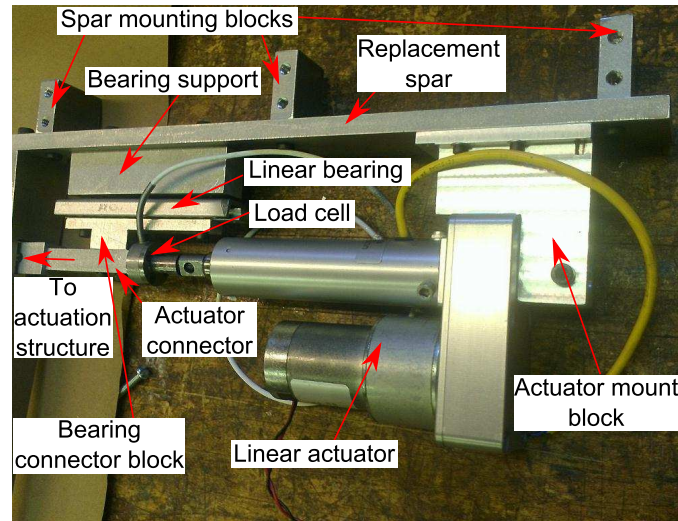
Schematic showing the actuation structure spar attachment assembly
